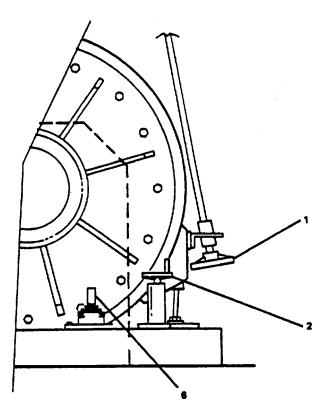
Double Drum Towing Machine (Sheet 2 of 2).
